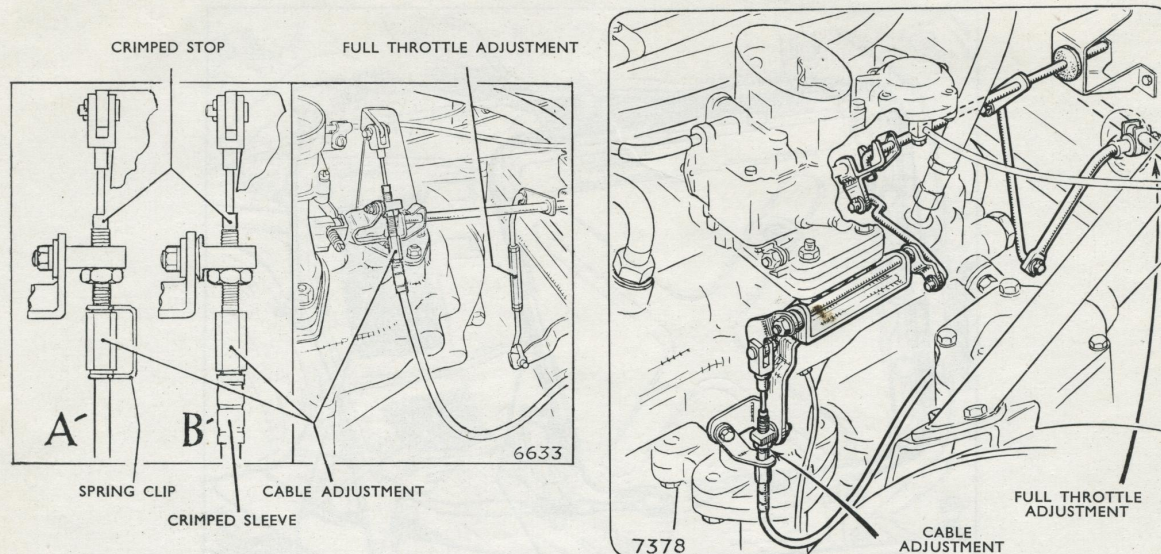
Downshift valve cable adjustment—views A and B show early and later cables
